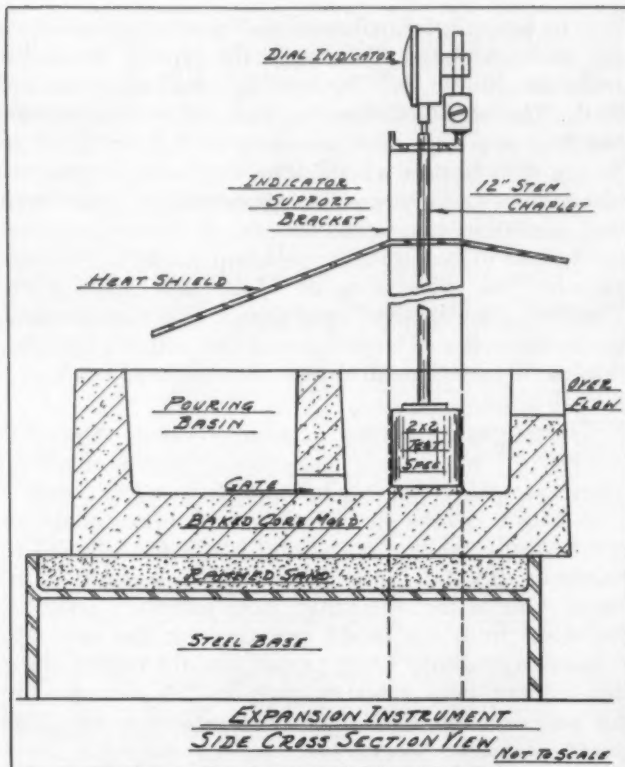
Sketch of complete instrument assembly as set for expansion test.
